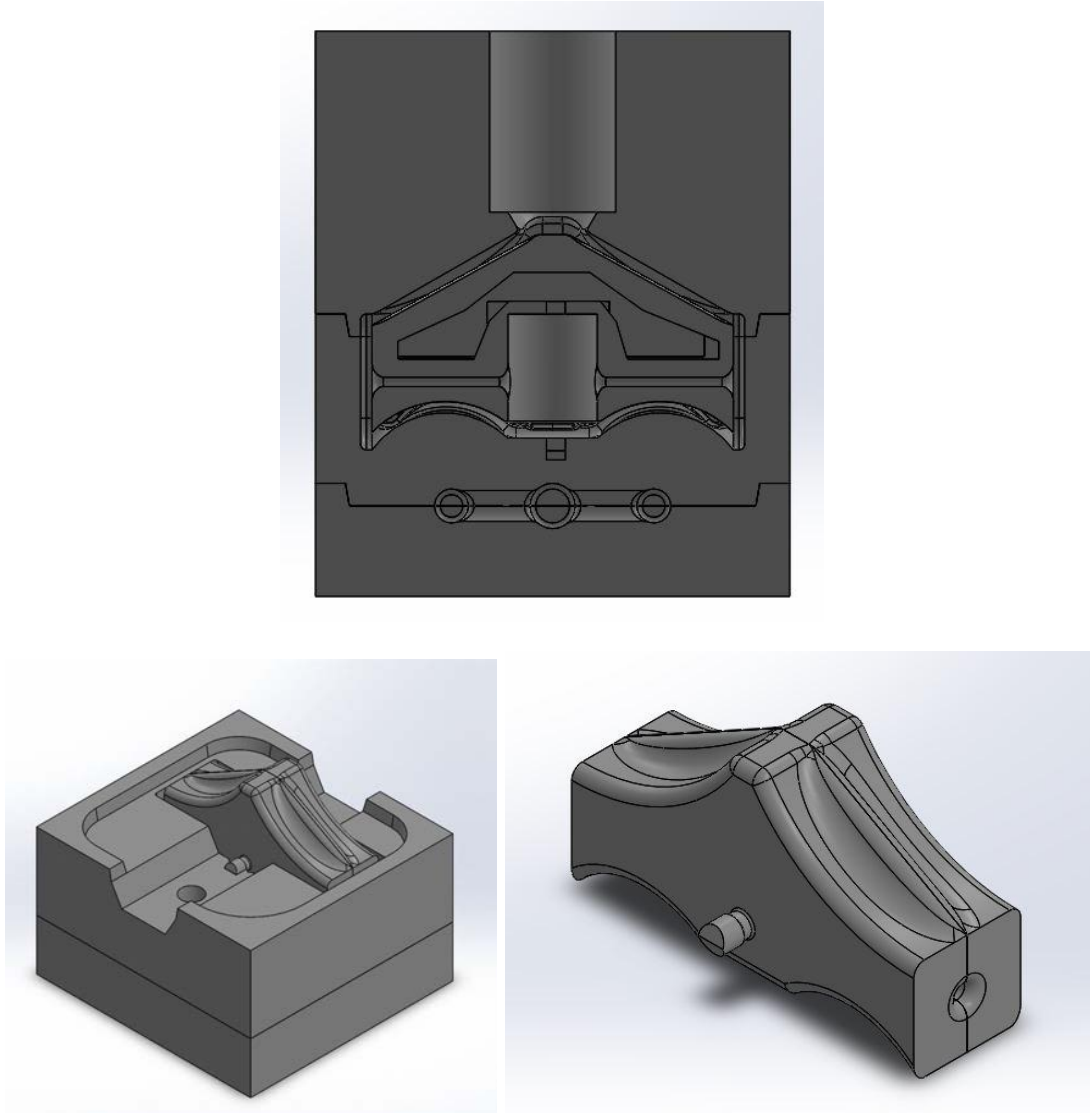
The aluminum casing mold's cross-section (top), middle with the top piece removed (bottom left), and hollow interior (bottom right).
